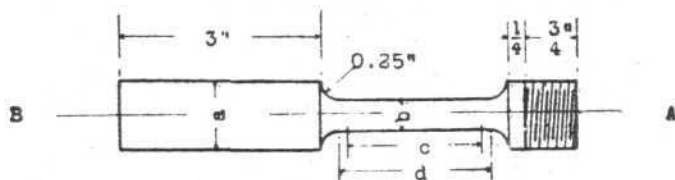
I.A.S.B. standard tensile test specimen for bars.
